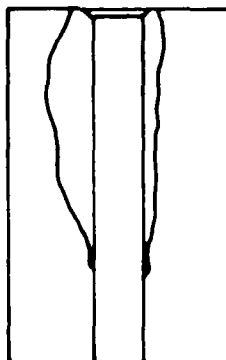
FRACTURES TYPE (b) SPECIMENS.
